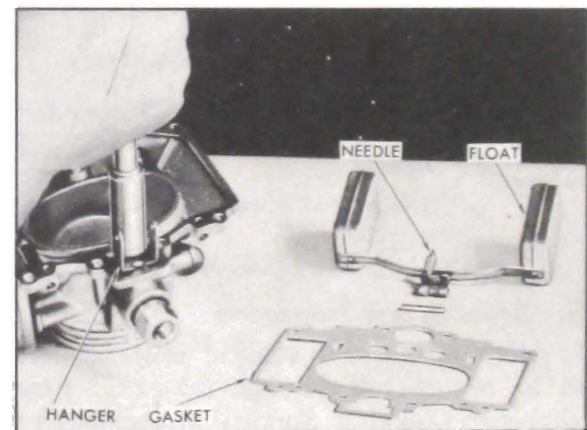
Removing Needle Valve Seat and Float Hanger
